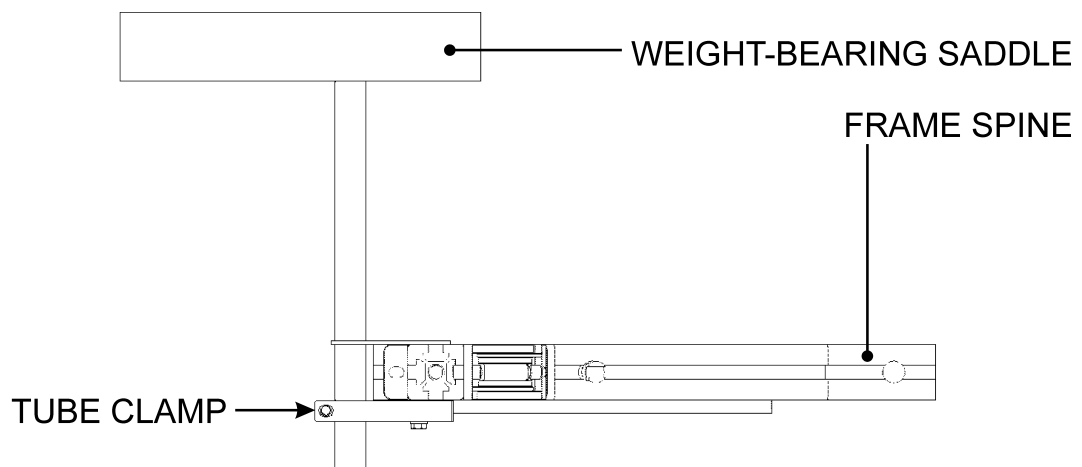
A drawing of the weight-bearing saddle mounted on the end of the frame spine.
